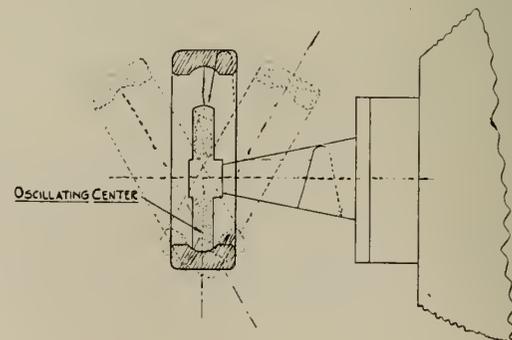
Diagrammatic View of Operation of Grinding for Inner Ring Grooves.
